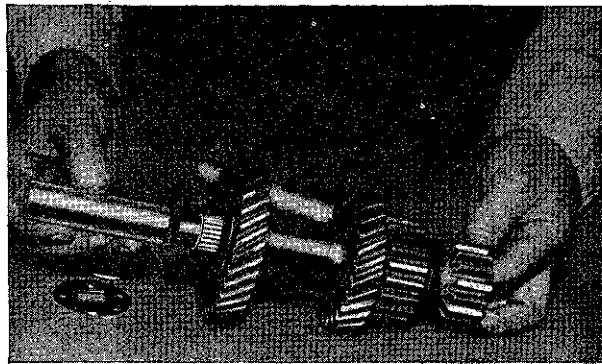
COUNTERSHAFT GEAR BEARING ARBOR
